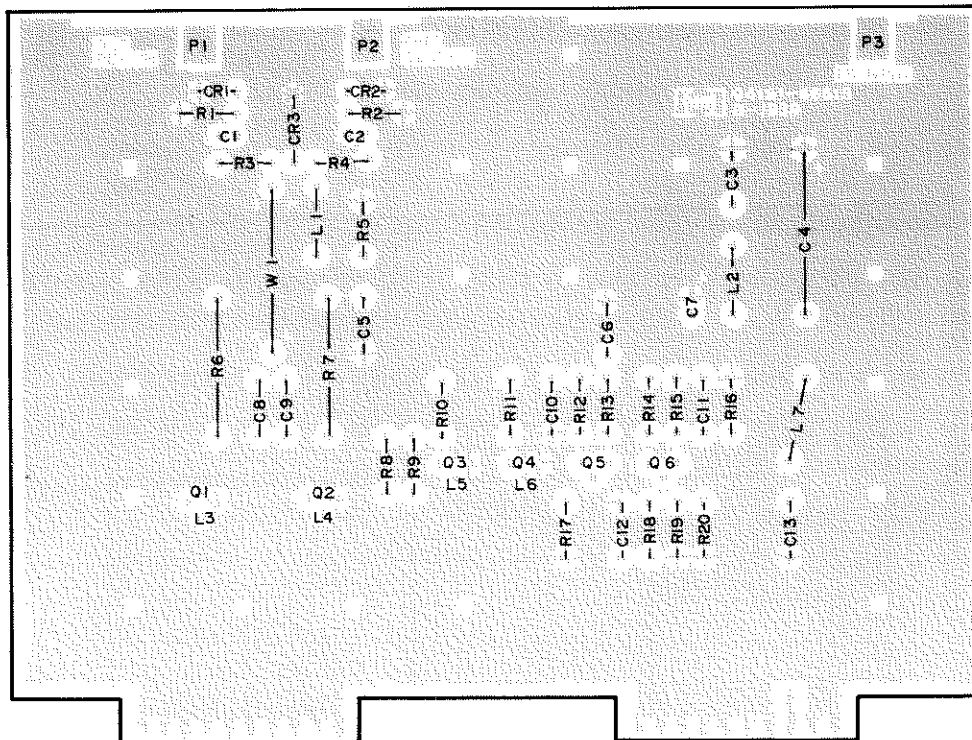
A15 Sampling Pulse Generator Board Assembly Component Locations.
